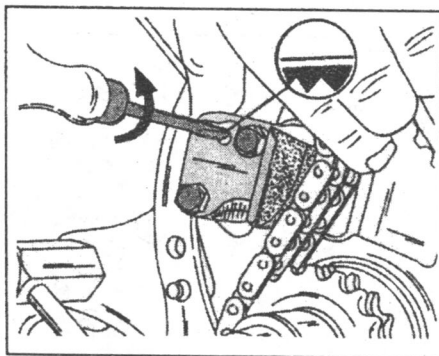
A Sedis chain tensioner is operated by an internal mechanism which must be locked in position before it can be removed.
